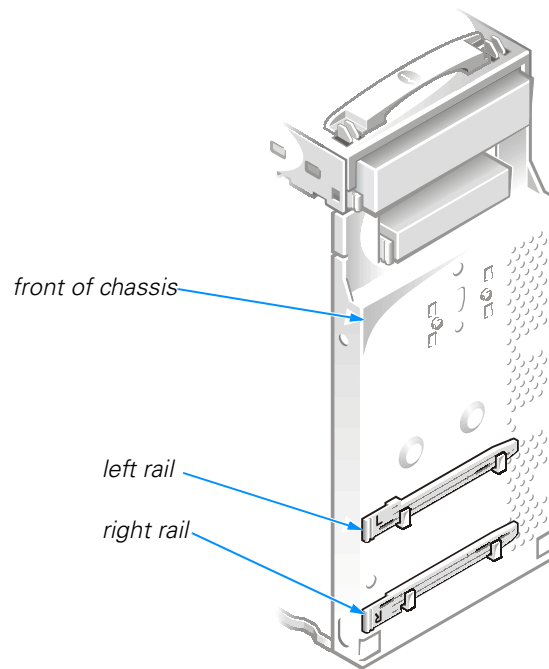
Locating Rails for the Upper 3.5-Inch Drive Bay
